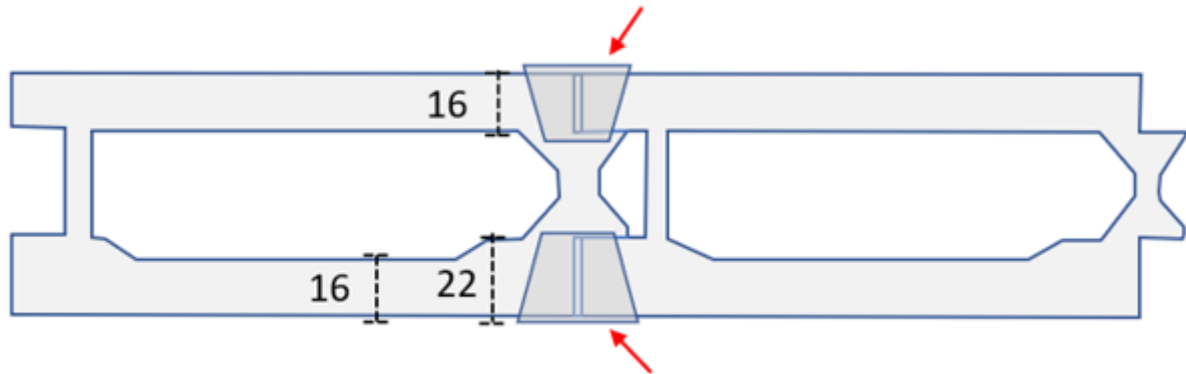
Cross-section view with thickness dimensions [mm] of two abutting extruded profiles, (red arrows) marks the location of two FS welds from top and bottom.
